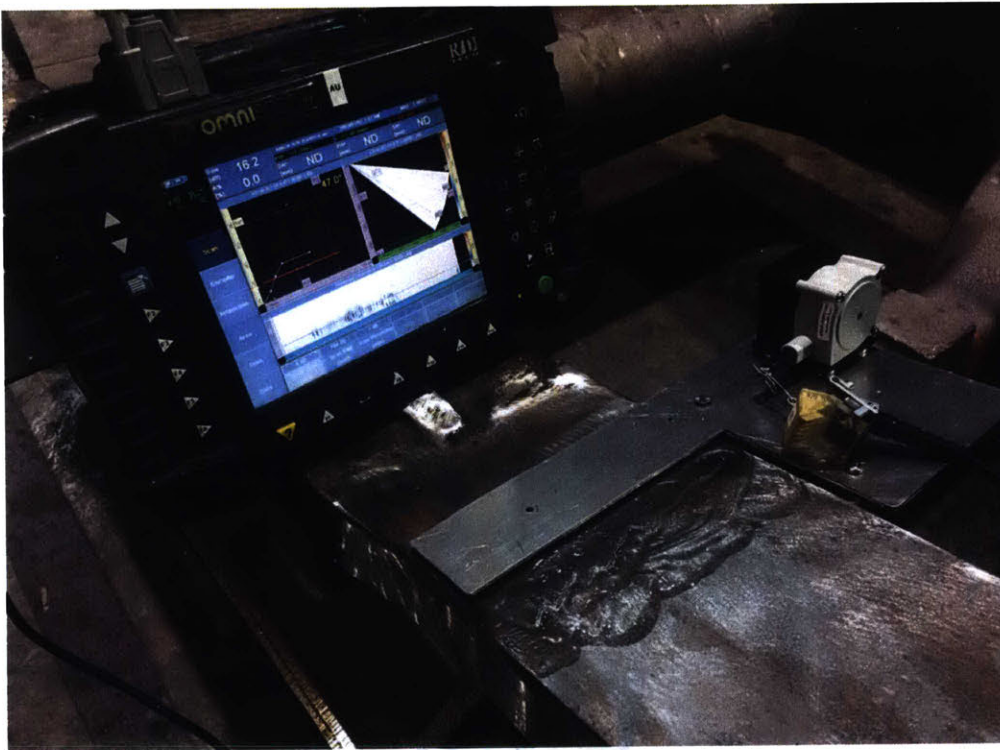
OMNISCAN MX WITH PROBE, ENCODER, AND FIXTURE TO INSPECT A D11 BUTT WELD
